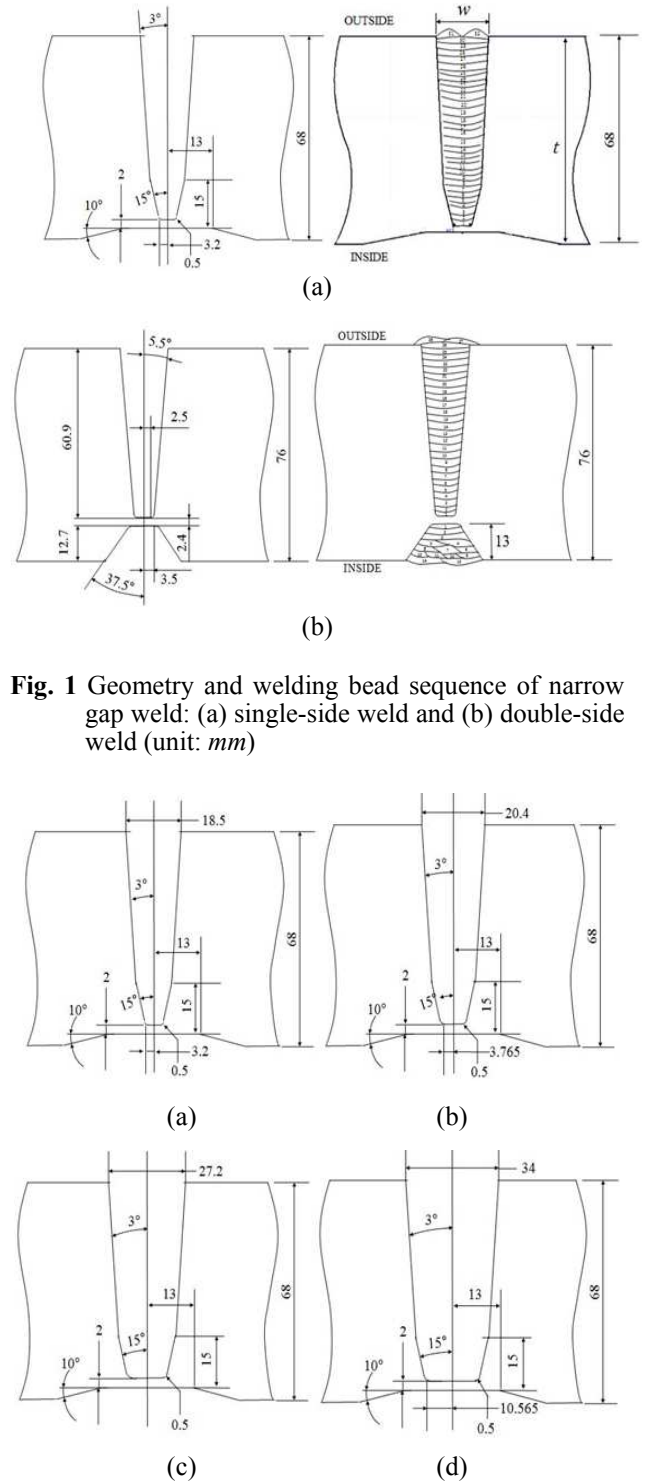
Geometry and welding bead sequence of narrow gap weld: (a) single-side weld and (b) double-side weld (unit: mm)
